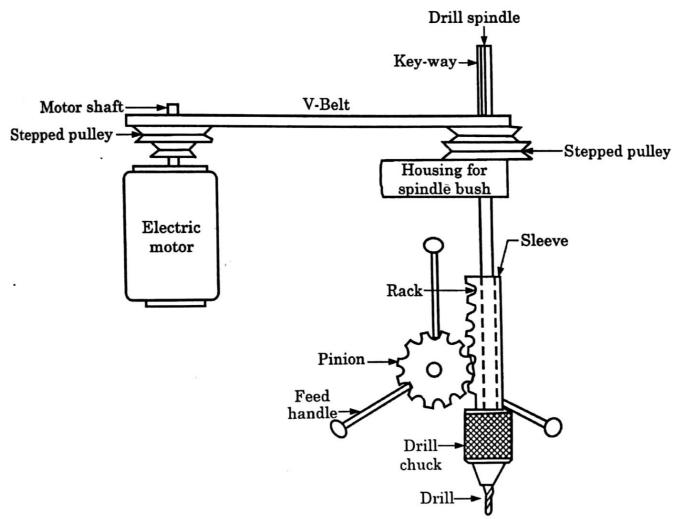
Drive Mechanism of a Sensitive Drilling Machine
